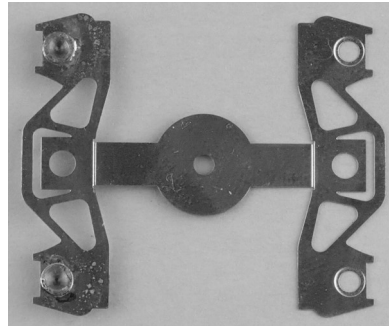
2TM bogie etch showing the correct orientation of the bearings.
